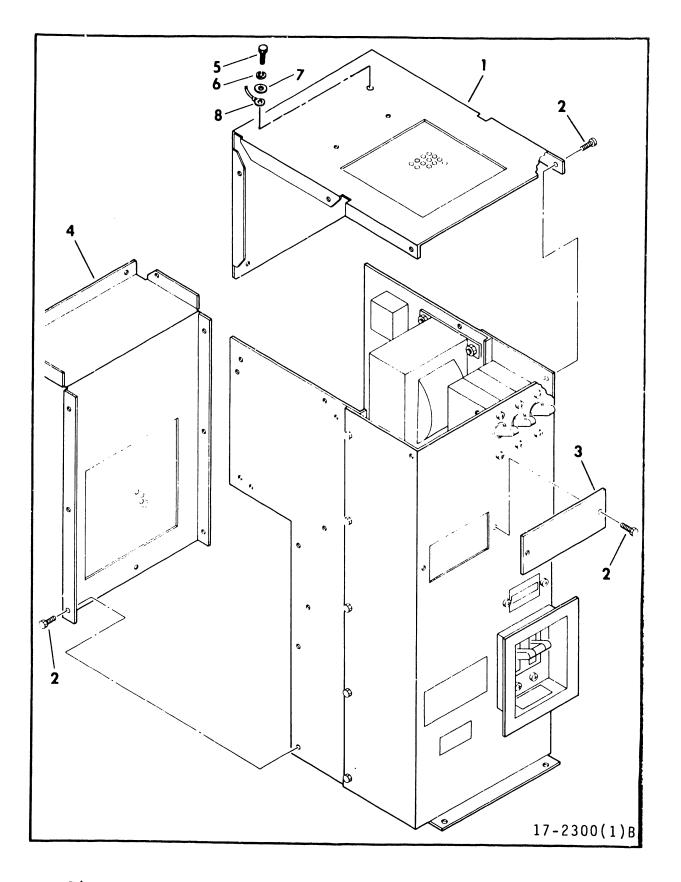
A-23. AC Power Supply Assembly (Sheet 1 of 4) 83323560 H
